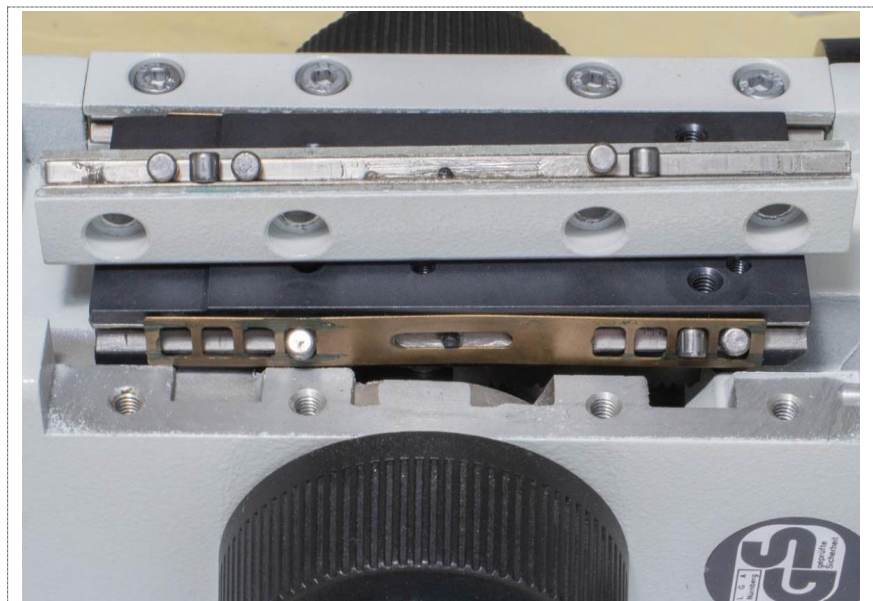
The focus slide with the removed right bearing guide put on top of the center bearing guide.
